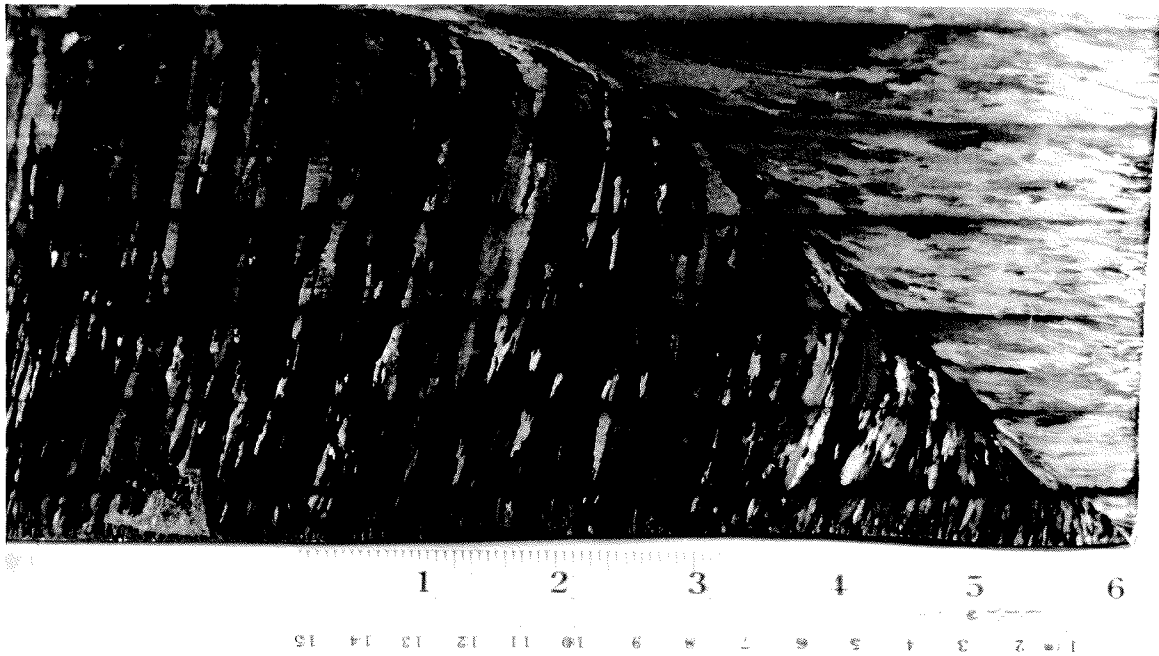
Photograph of a section of the AISI 304 stainless steel slab exhibiting gutter problems.
